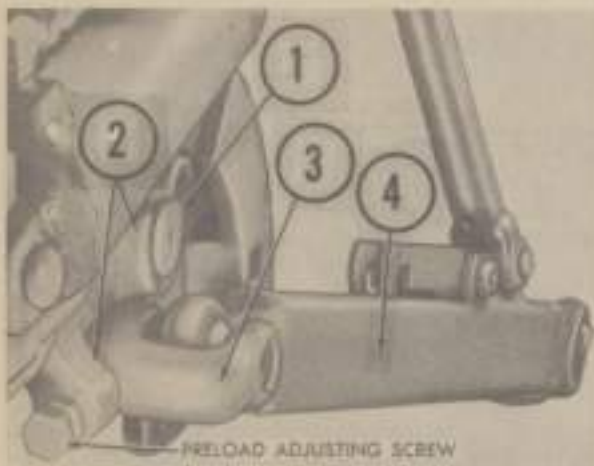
View of the torsion bar preload adjusting screw and locknut for Series IV D-17 tractors. Refer to paragraph 259 for adjustment procedure.
